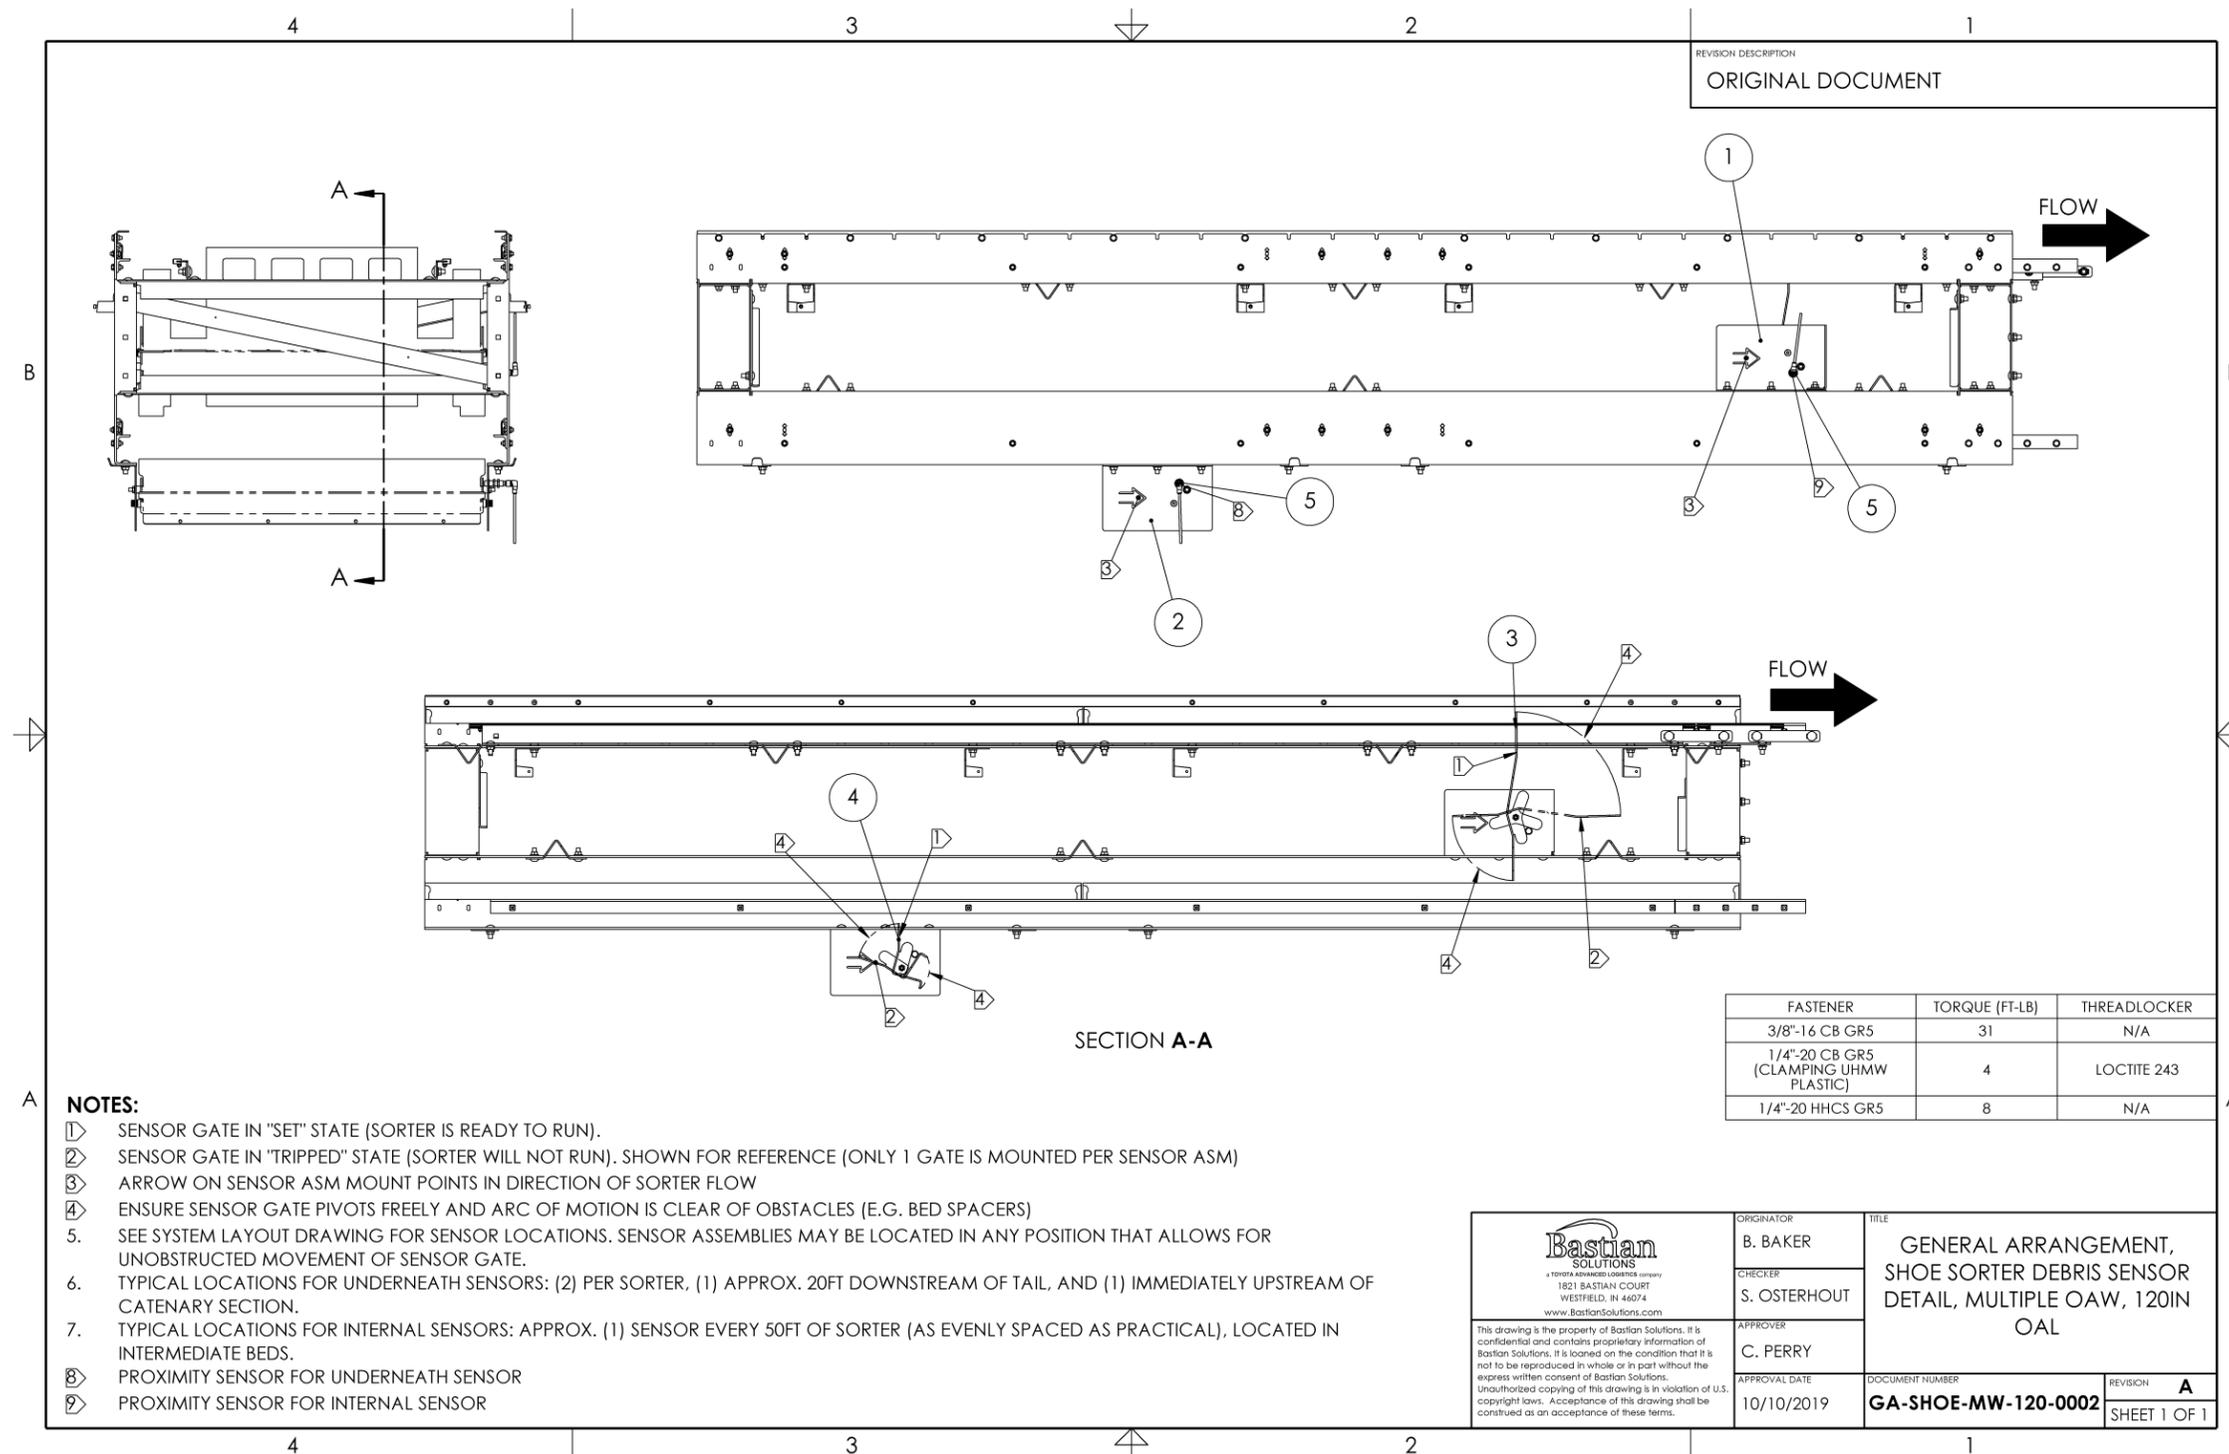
General Arrangement, Shoe Sorter Debris Sensor Detail, Sheet 1 of 1
